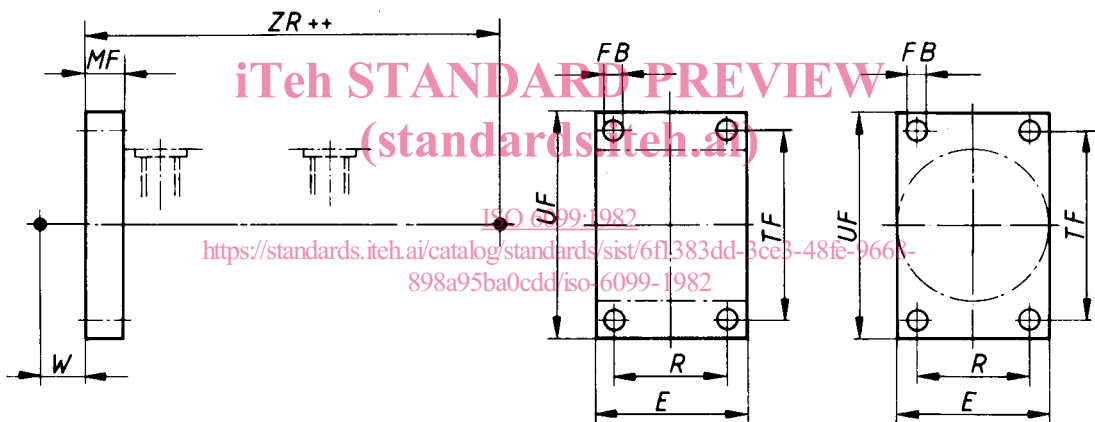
(MDF 1) Head, rectangular flange — Double rod
